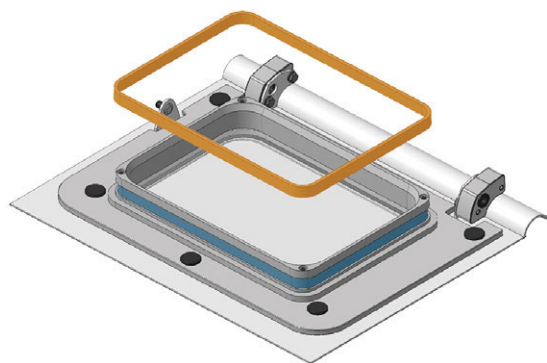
GASKET (MARKED ORANGE) OF THE WORKING CHAMBER DOOR AND GROOVE (MARKED BLUE)
